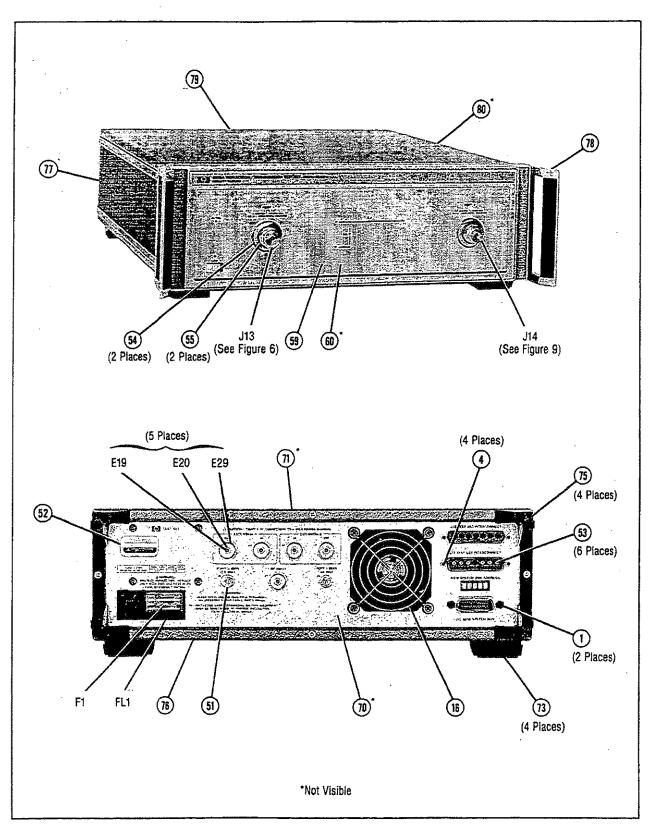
HP 8513A Miscellaneous Mechanical, Chassis, and Electrical Parts (1 of 5)
